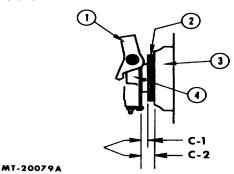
Release Bearing Clearance (Lipe LP, LPA Clutches)
